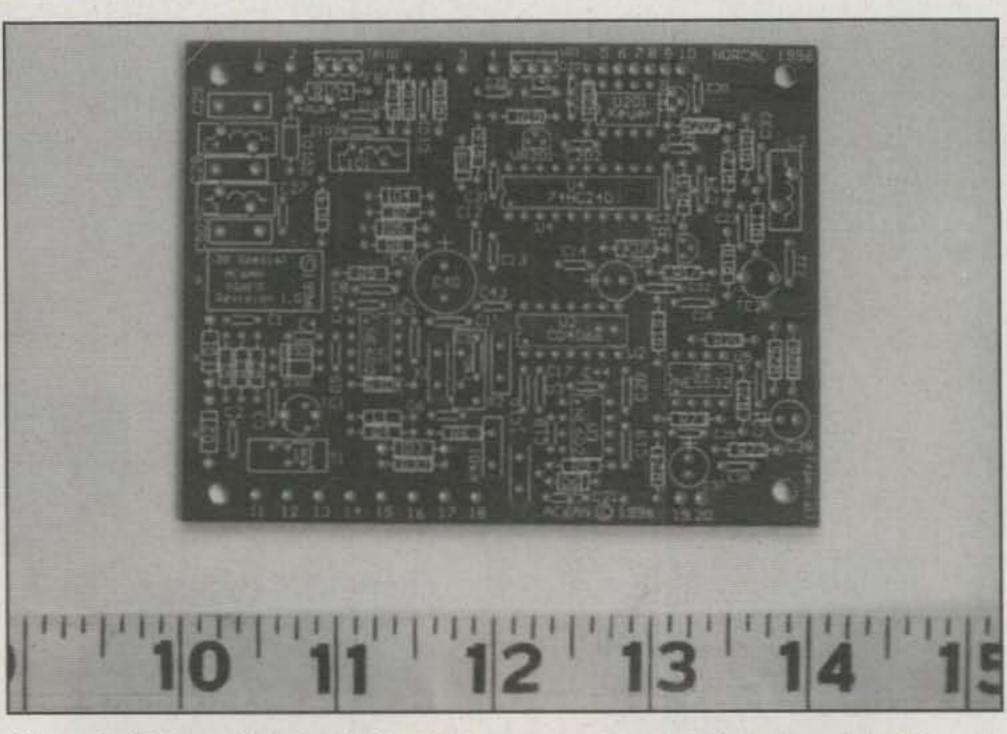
PC board of the 38 Special measures 3 by 4 inches, has plated-through holes to minimize intermittent connections, and has silk screening to easily identify parts locations.
